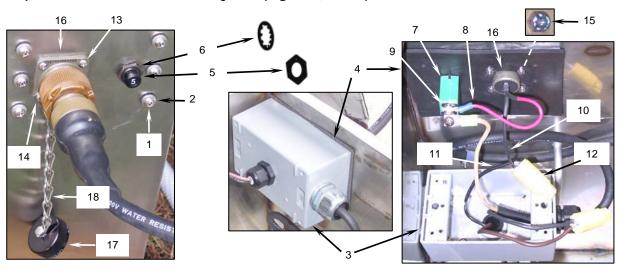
Removing the Grease Separator Weatherproof Box Gasket.
